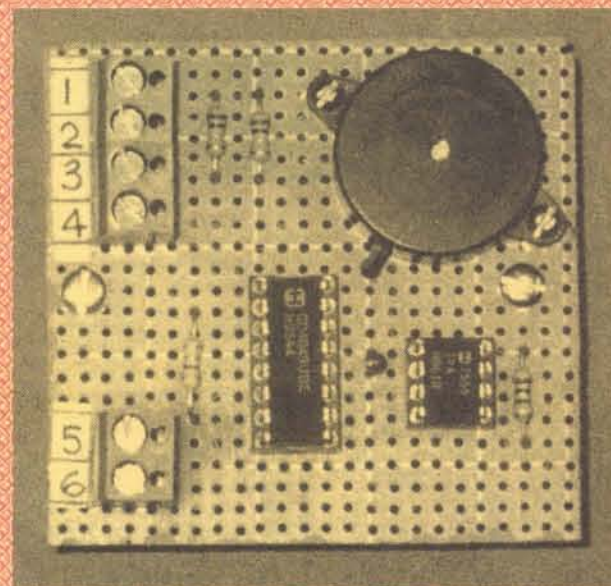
CONTROL CIRCUIT MODULE — This is assembled on the project board, and holds all the electronic components, including IC1, IC2, and the circular buzzer. The integrated circuits are installed in wire-wrap sockets. Component location is not critical.
